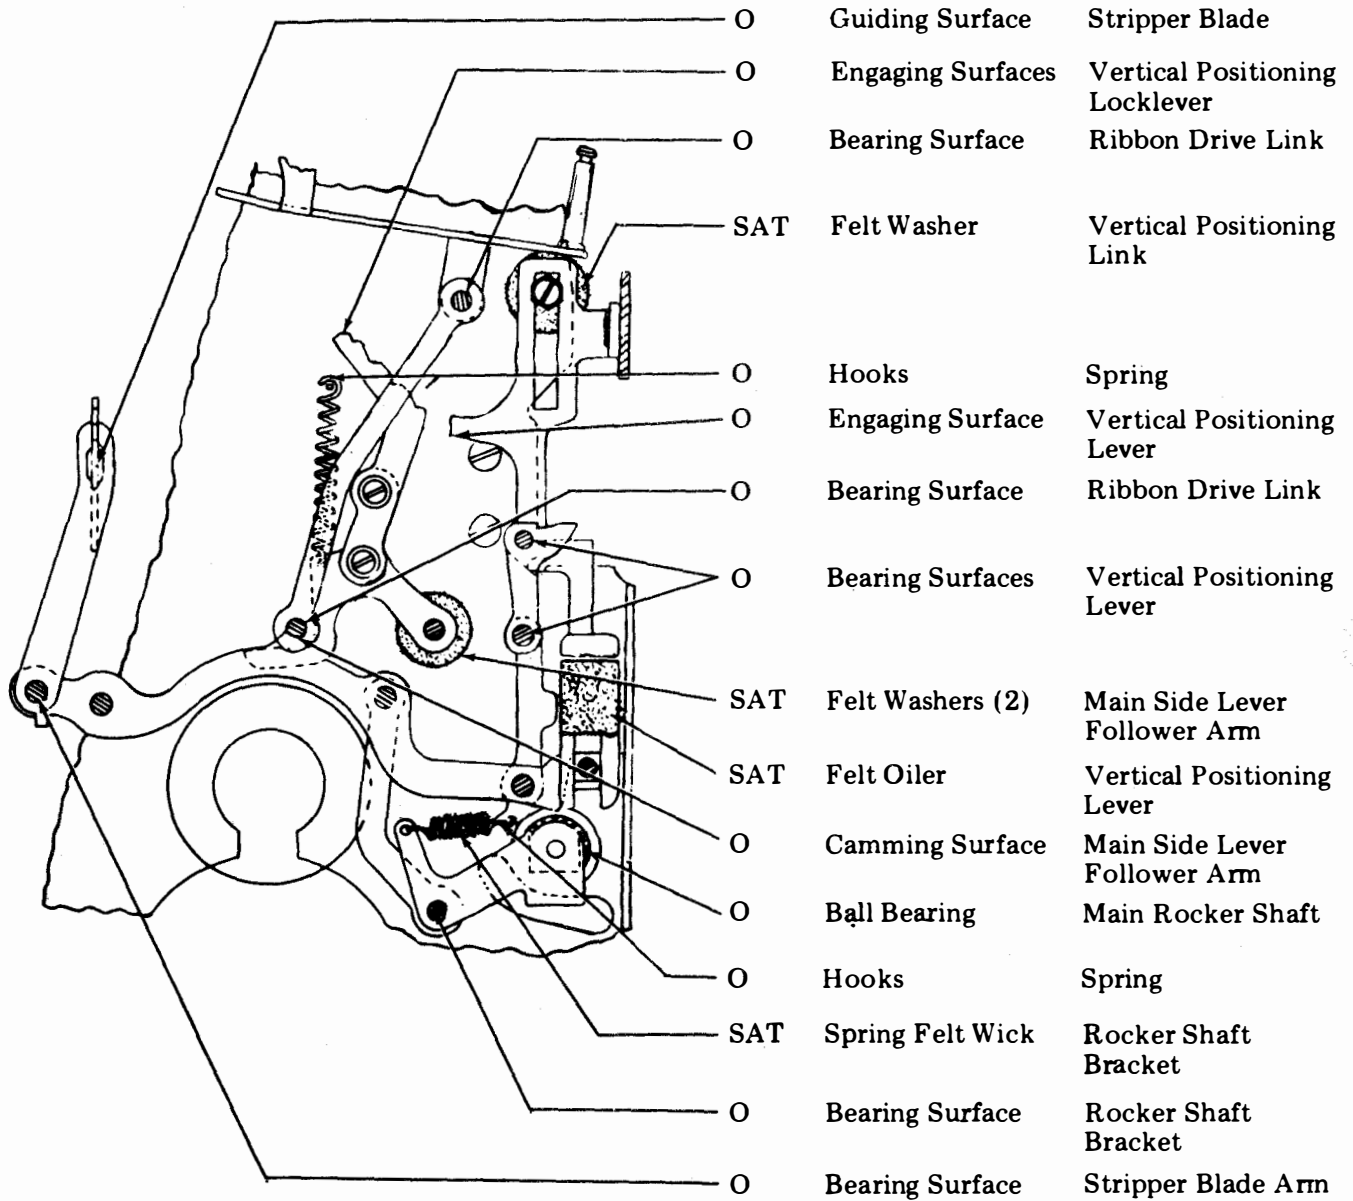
Vertical Positioning Mechanism, Left Side View
